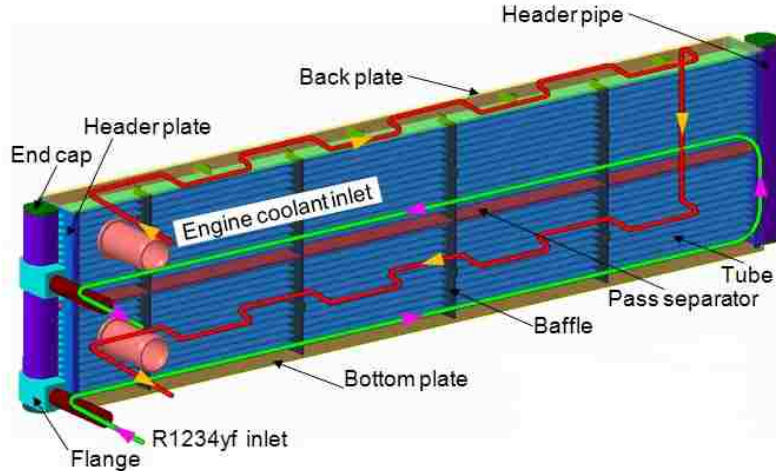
Layout of the shell and tube evaporator [32].
